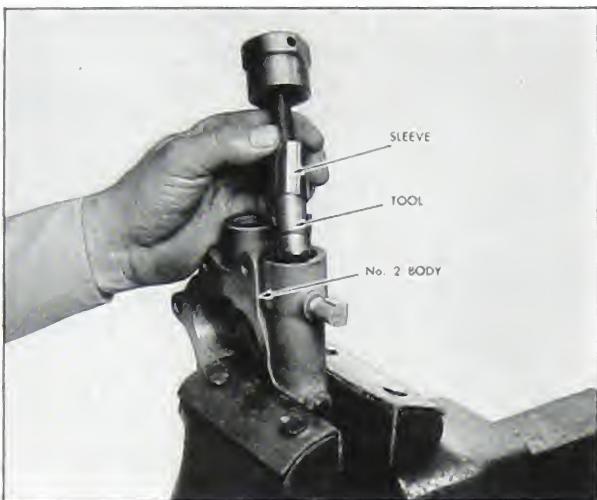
Pulling pressure regulator valve sleeve with ST-170
